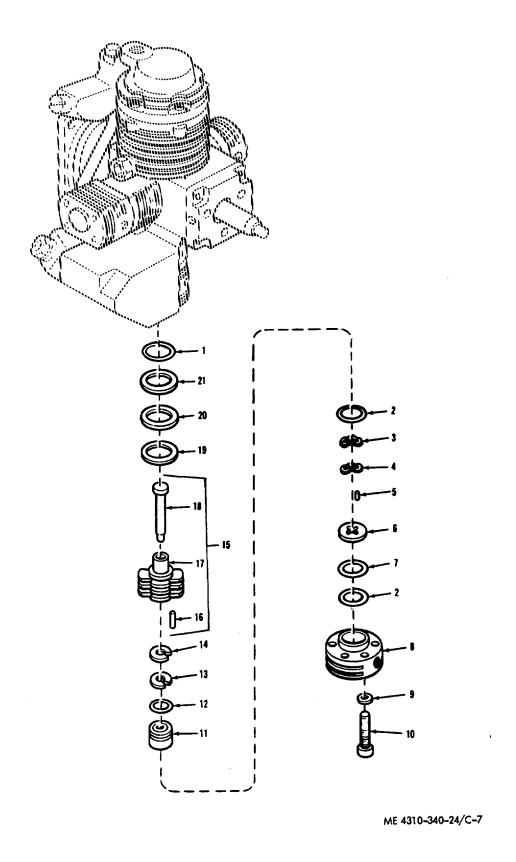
Fourth stage cylinder, cylinder head and related parts – exploded view
